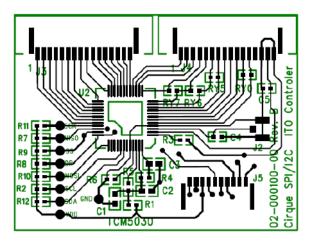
TCM5030 Reference Design PCB Layout Example - Layer 1
